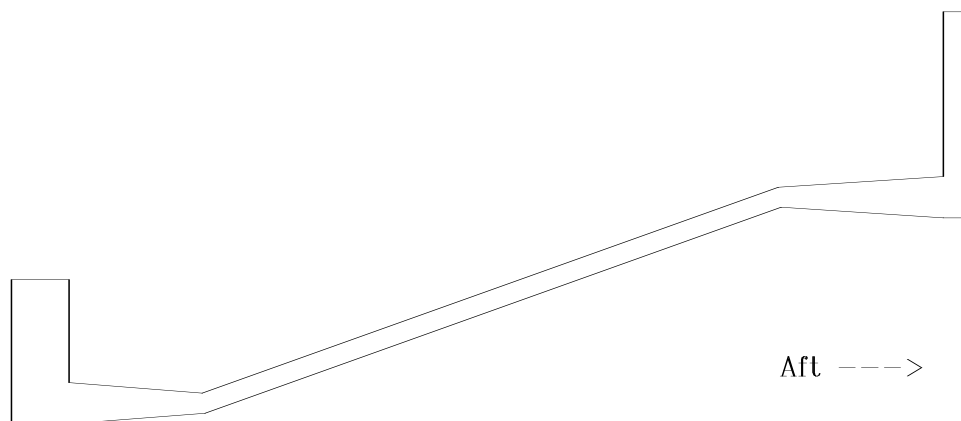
Cross-section of Generic Turbine Engine Casing
